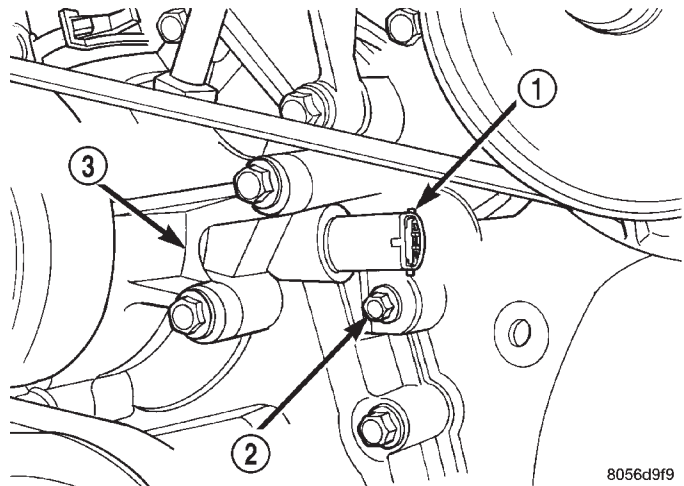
CMP Sensor Location—8.0L V-10 Engine
